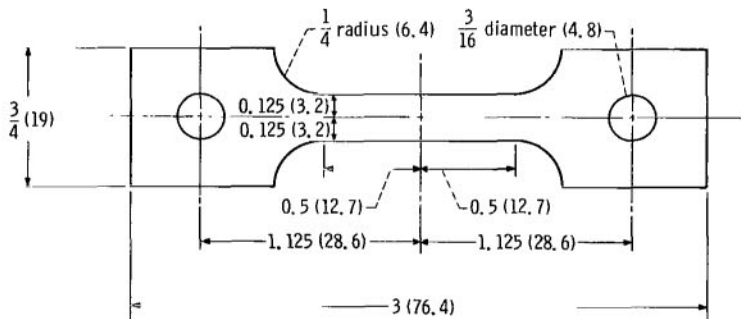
Tensile specimen design. All dimensions given in inches (millimeters).
